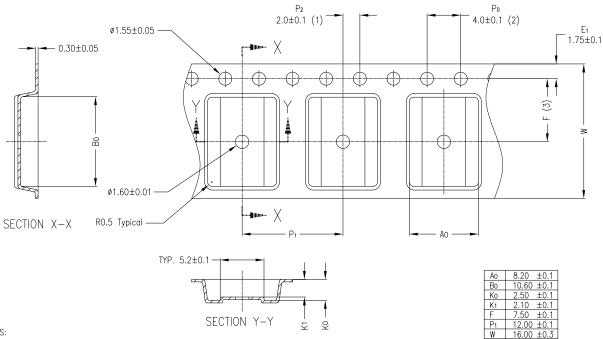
28-Pin SSOP Carrier Tape Drawing
